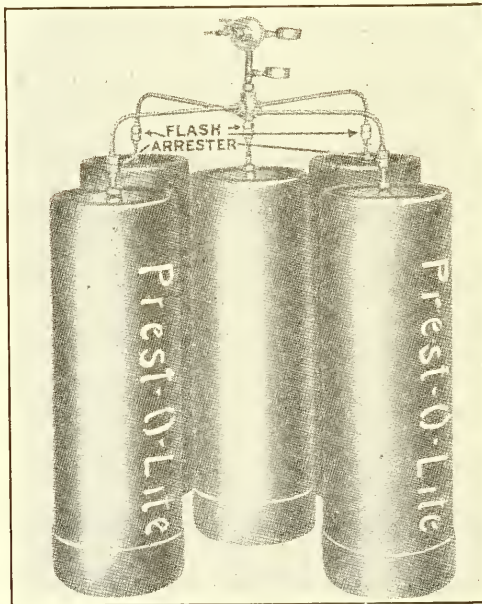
Prest-O-Lite Acetylene-Cylinder Manifolds.
